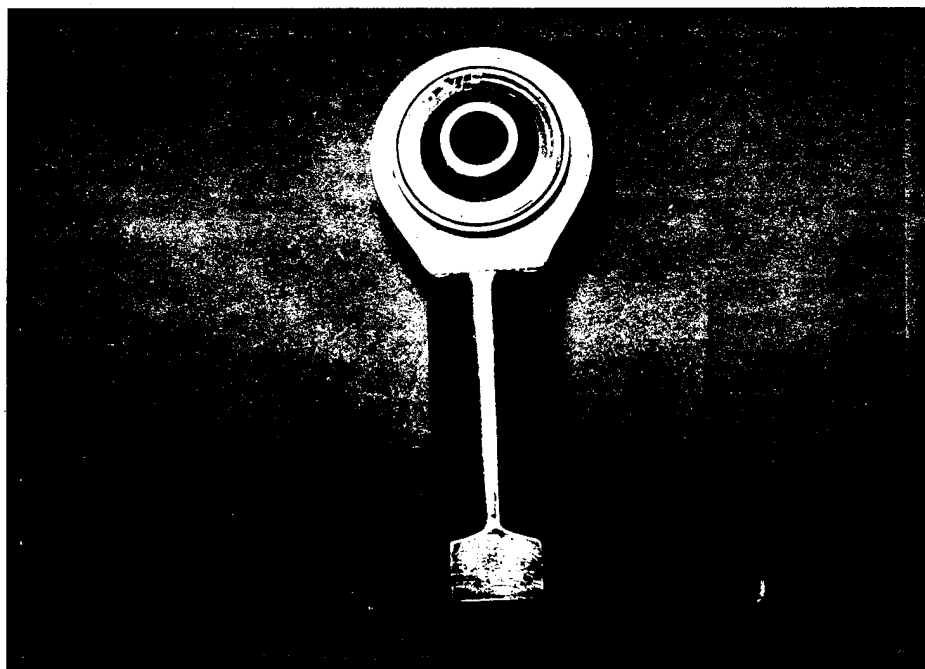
Typical Test Bearing After it is Pressed Into Housing.
